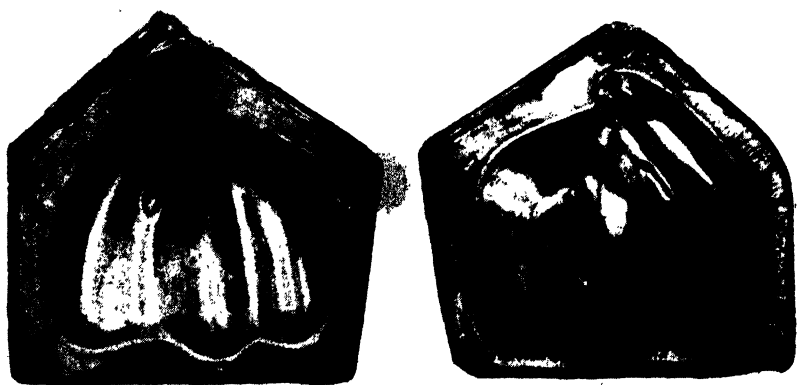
Duralumin parts for aircraft components, formed between lead punches and zinc dies.
